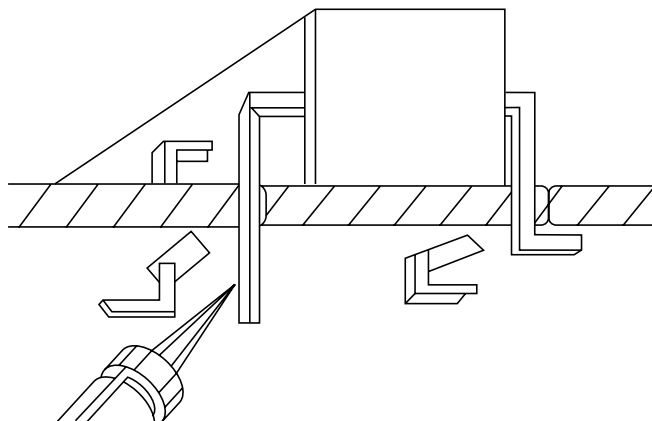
USE SOLDERING IRON TO PRY LEADS
